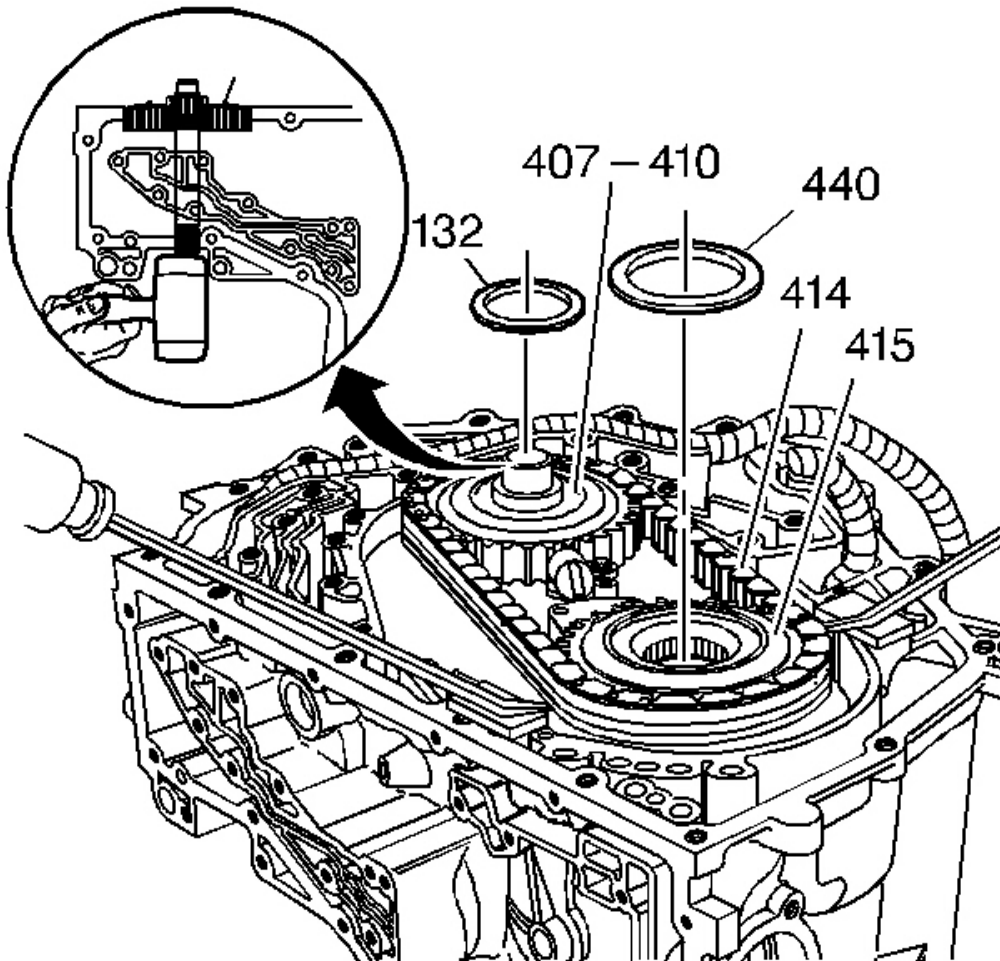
Expanded View Of Drive Sprocket And Turbine Shaft Assembly
